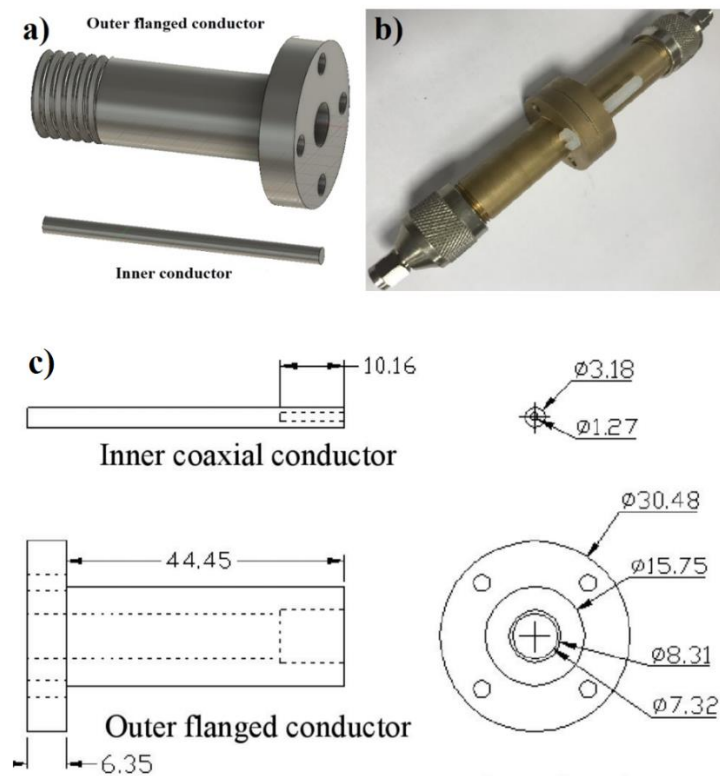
15 (a) The drawing of inner and outer conductor (b) appearance of the test fixture (c)The manufacturing drawings and dimensions of the small-sample holder for EMI shielding measurements.
